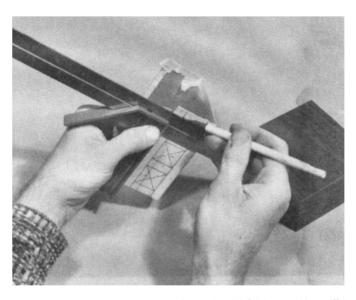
Using a ballpoint pen or soft lead pencil, mark locations and outline all holes to be cut.
